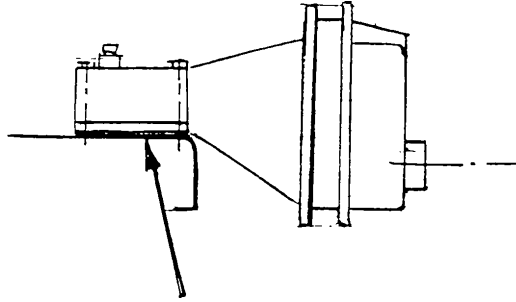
Gasket between Air Intake Adapter and Intake Manifold.
